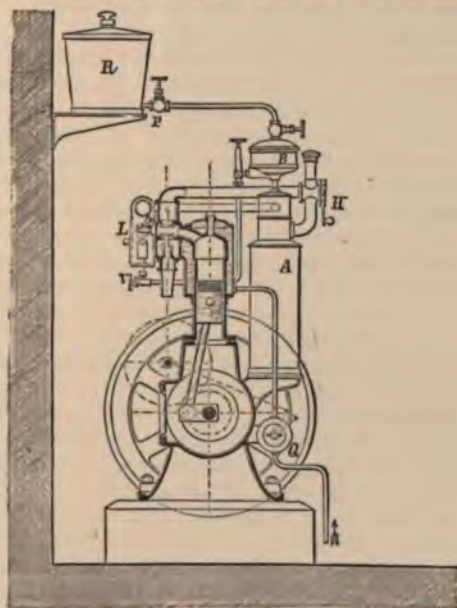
Daimler Oil Engine—Section of Cylinder and Valves.
